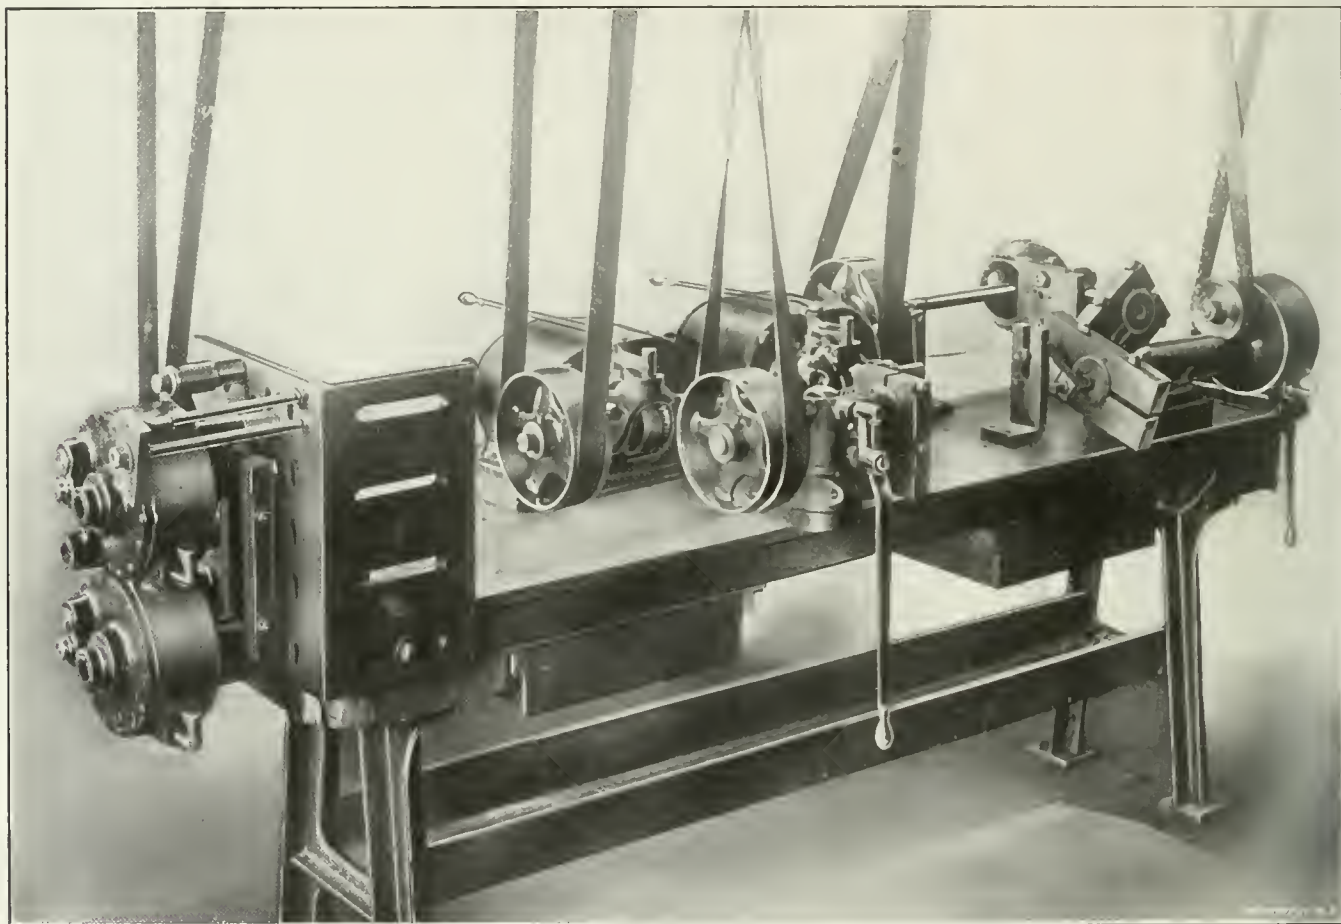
Testing the Various Units—Feed-gear Boxes, Traversing Gear, etc.—before Final Assembling on the Machine
